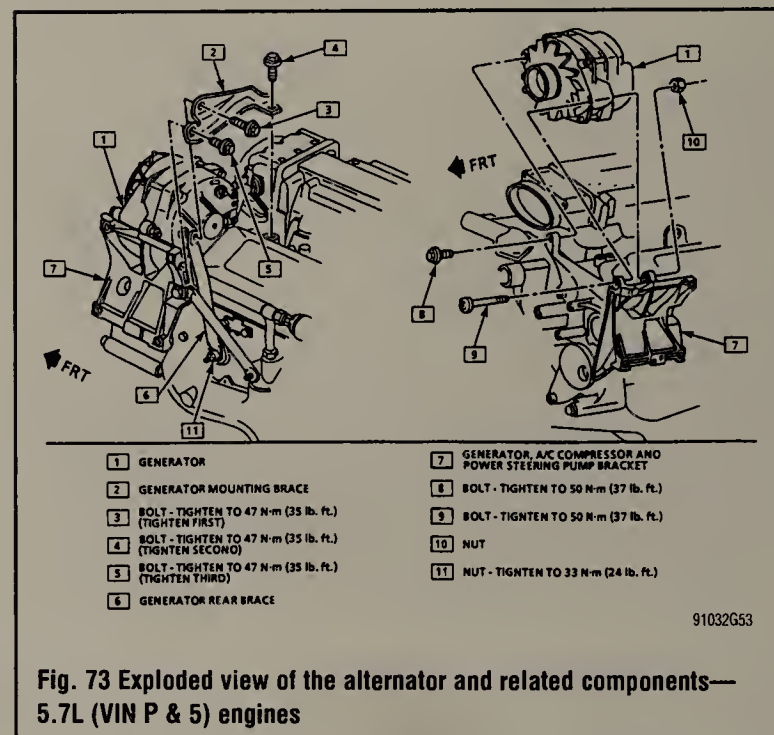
Exploded view of the alternator and related components—5.7L (VIN P & 5) engines
